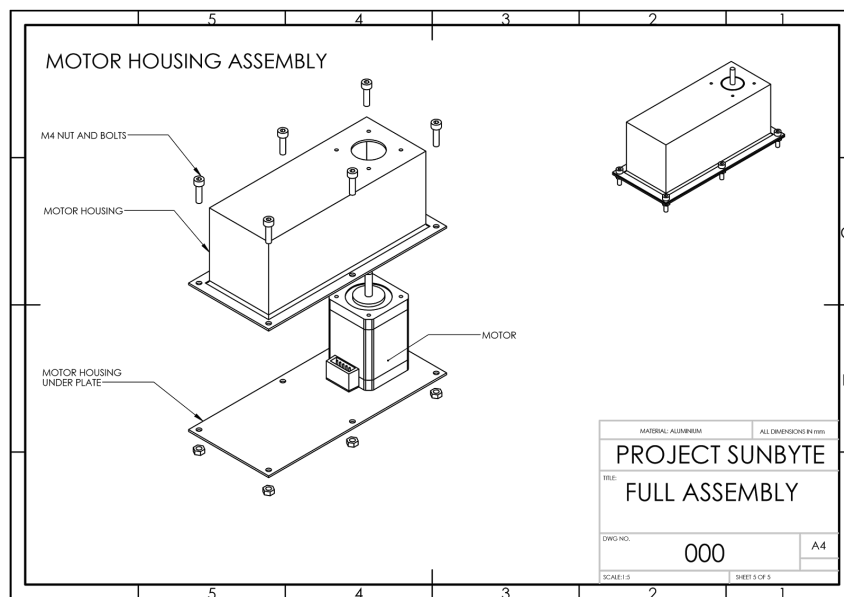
Motor Housing Assembly Drawing
